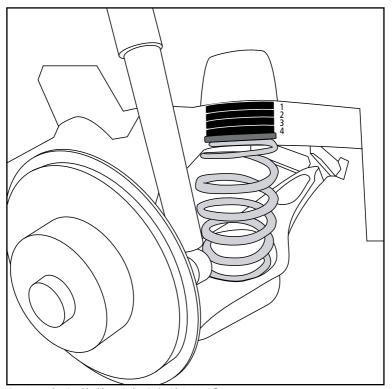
, Barrel spring (double conical spring) with SPACCER®
